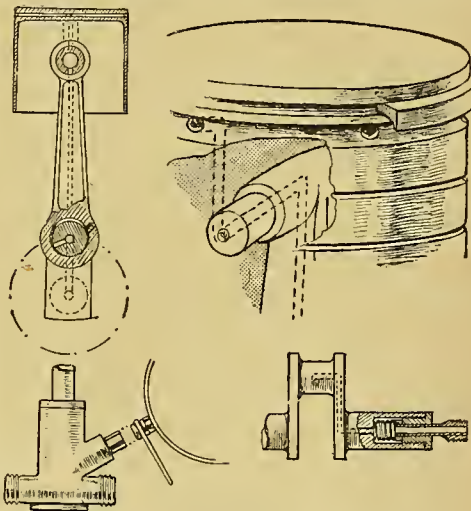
Pullin's lubricating device. Pat. No. 109,113
